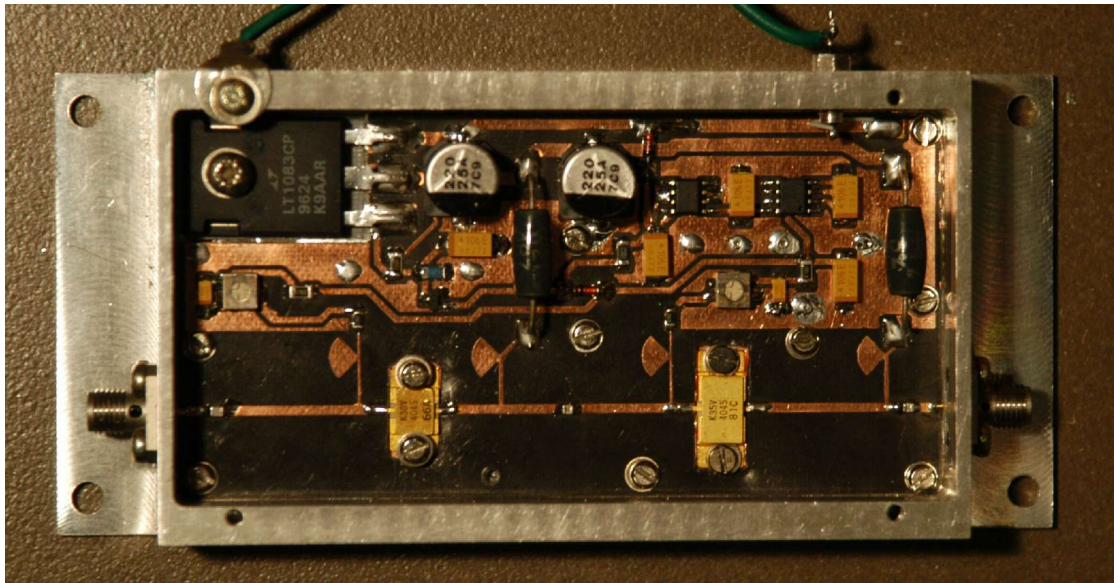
Completed amplifier, ready for mounting on heatsink and tune-up.
